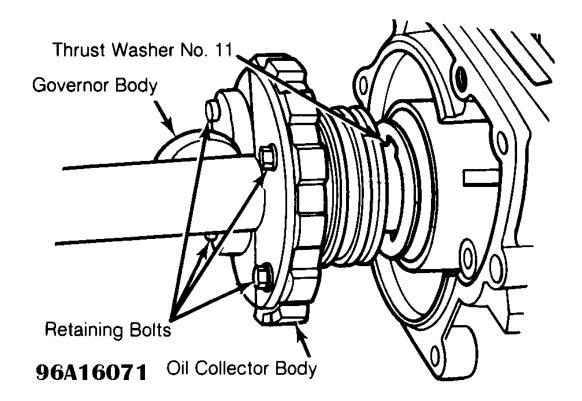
Removing Governor Assembly Courtesy of FORD MOTOR CO.
